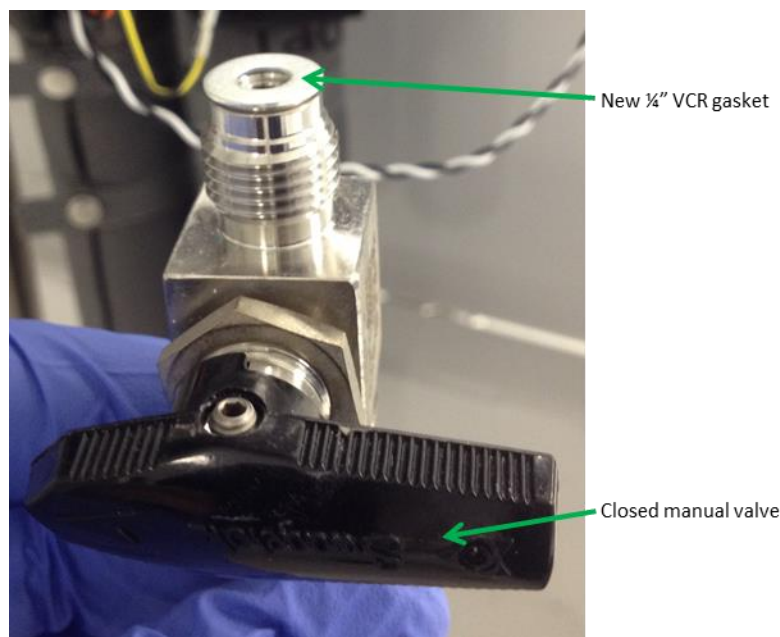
Picture of new VCR gasket placed on manual valve in preparation for installing on ALD valve.
